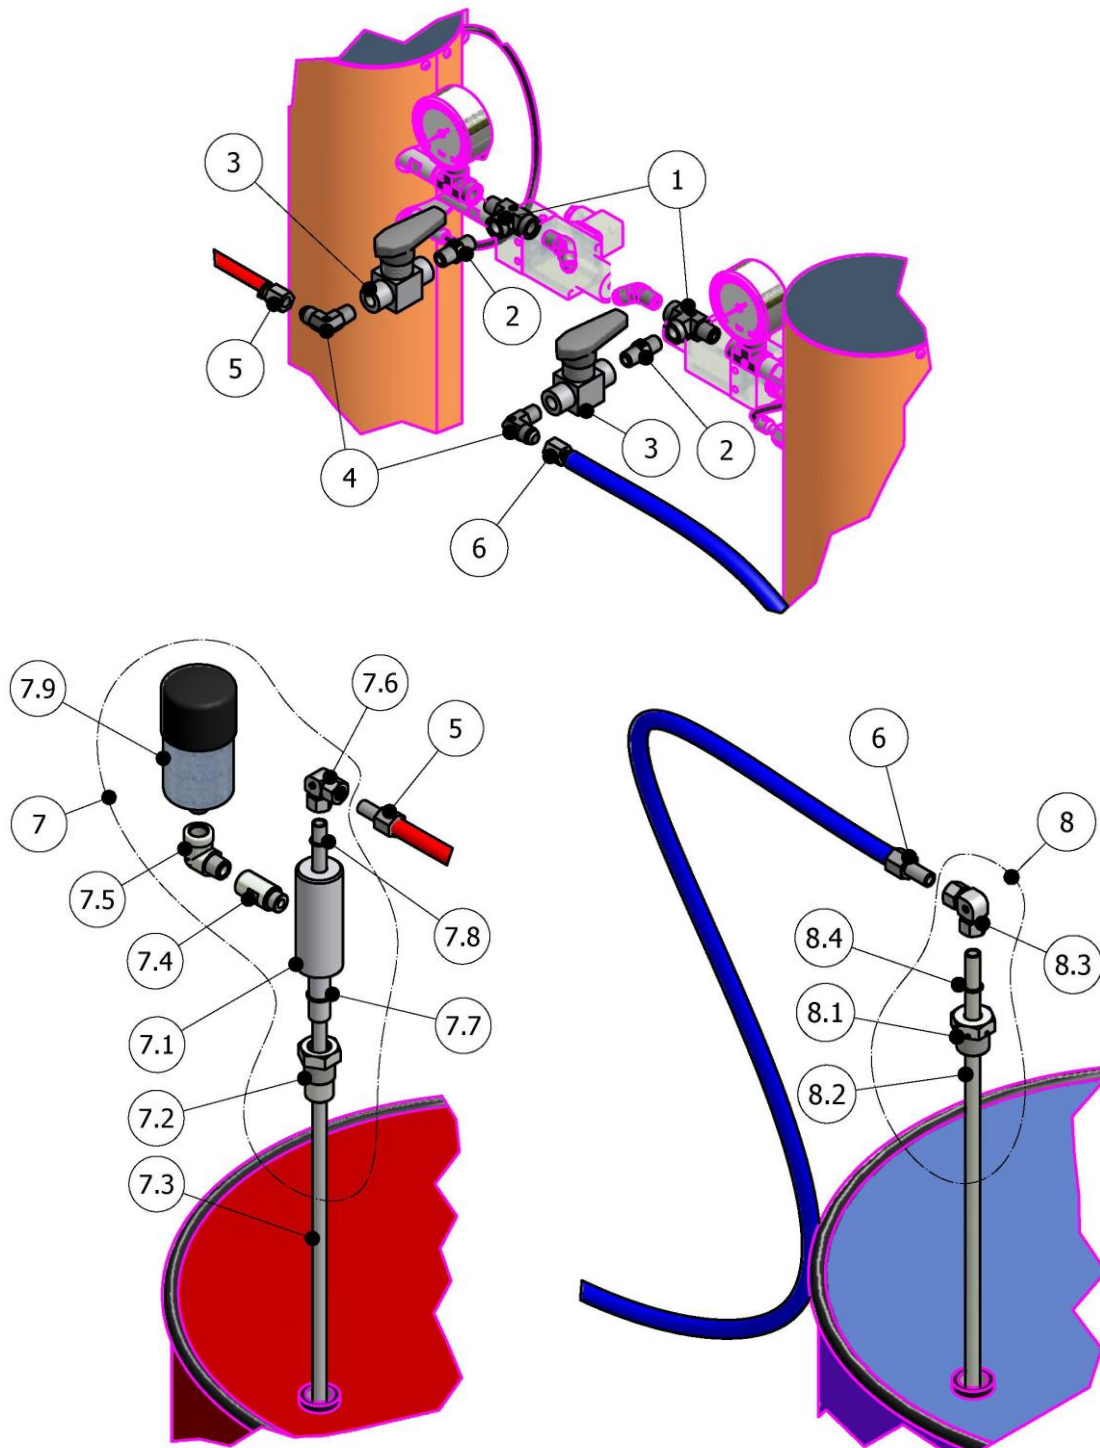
Recirculation Kit P#: KT-00038-03, Exploded View
